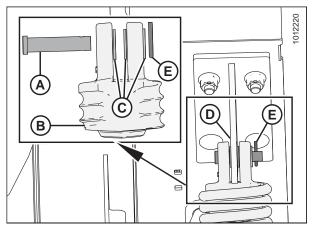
Left Side Spring Float Assembly Shown – Right Side Opposite
